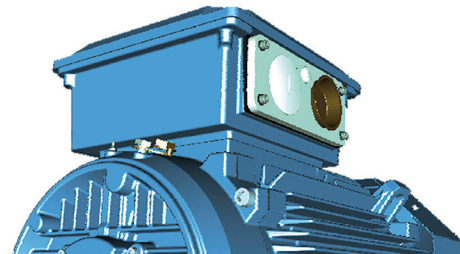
Terminal box for motor sizes 160 – 250. Connection flanges with tapped cable entries.
